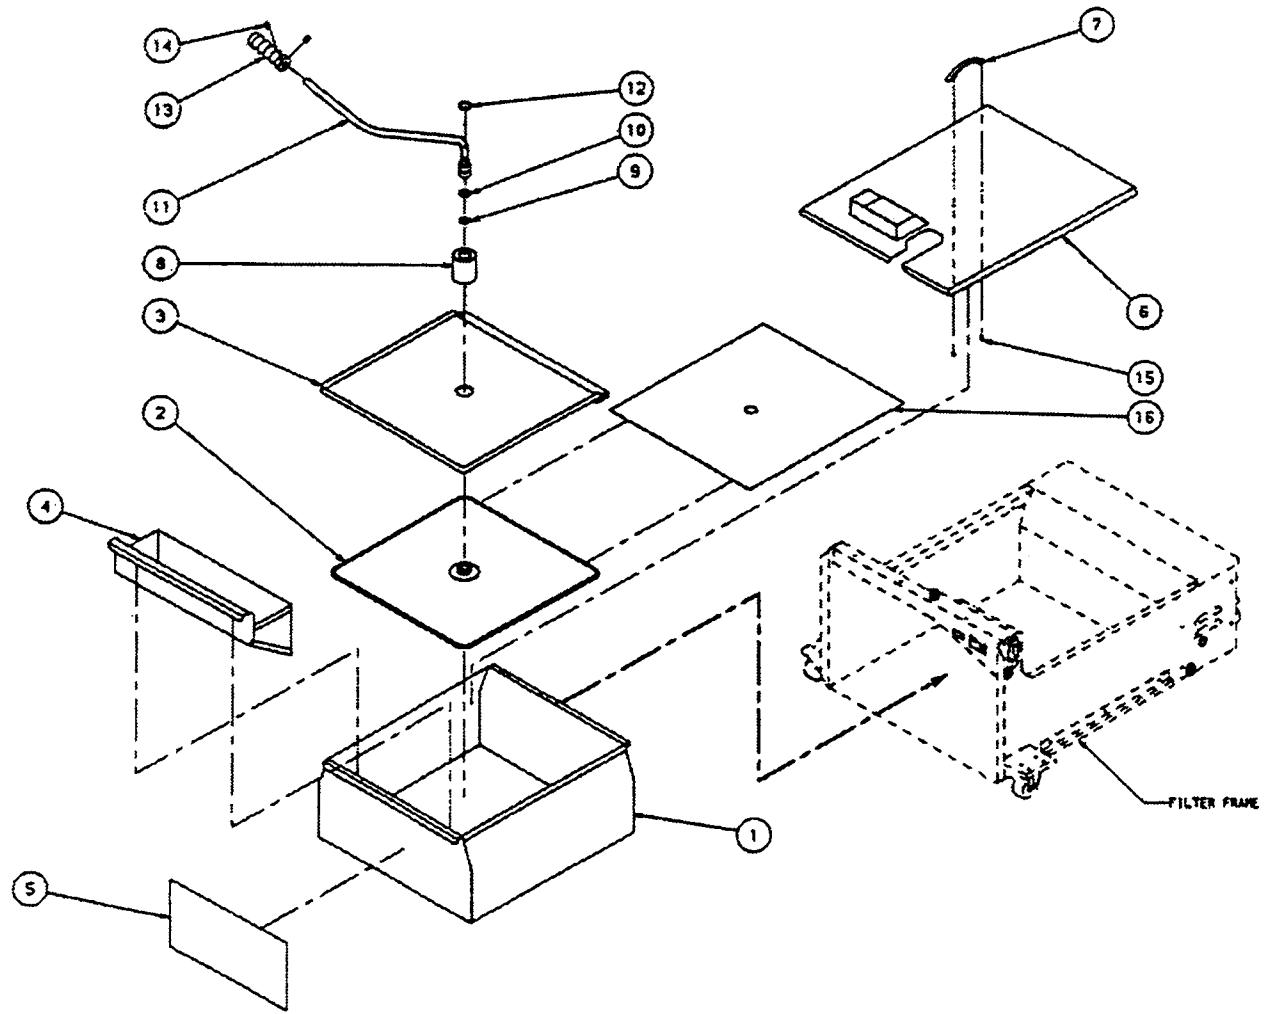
UFM Filter, Pick-Up/Pan Assembly
